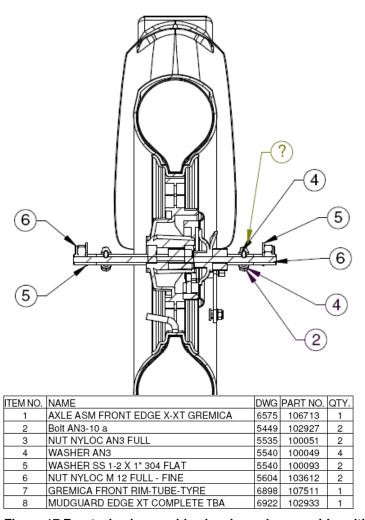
Front wheel assembly showing axle assembly, with axle locking bolts in place
